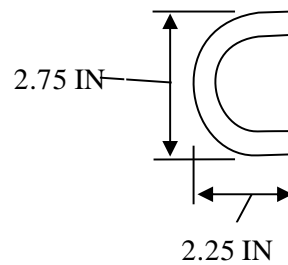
Loop tie down formed from 1/2-in (12.7 mm) steel rod.
